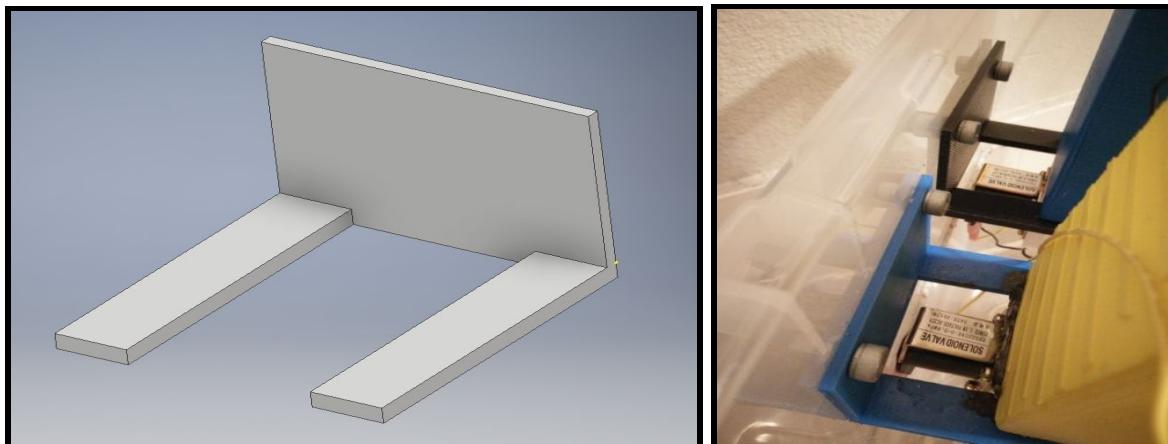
CAD Model of forklift holder on Autodesk Inventor (left) and picture of mounting (right). The holder's back wall, it is 80mm long, 55mm wide and 3.175mm thick. The tip of the rectangular extensions are 80mm away from the back wall. The extensions are 17.5mm wide and 5mm thick.
